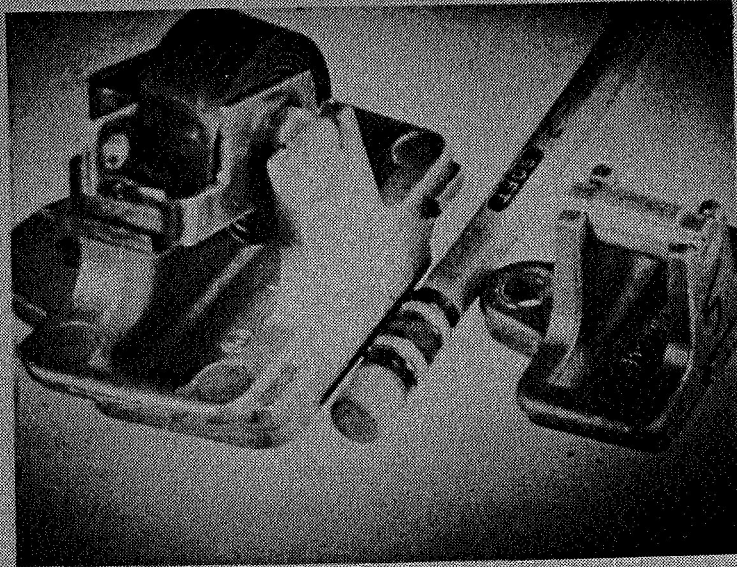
Similar automatic choke thermostat components that were joined by different methods. The shaft was held in place in the left assembly by crimping; manual gas tungsten-arc welding was then used to weld one end of the aluminum shaft to the die-cast aluminum body. Both ends of the shaft were Ultrapulse welded in one pulse to the body on the right.
